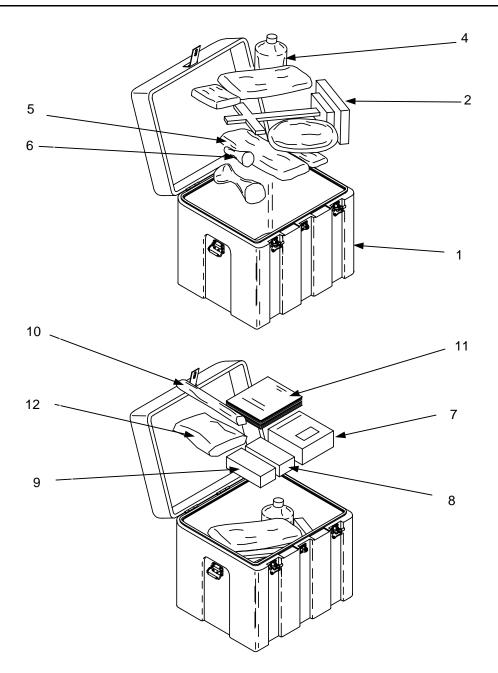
Footlocker No. 2 0024 00-(1 Blank)/2 TM 10-9925-100-12&P
